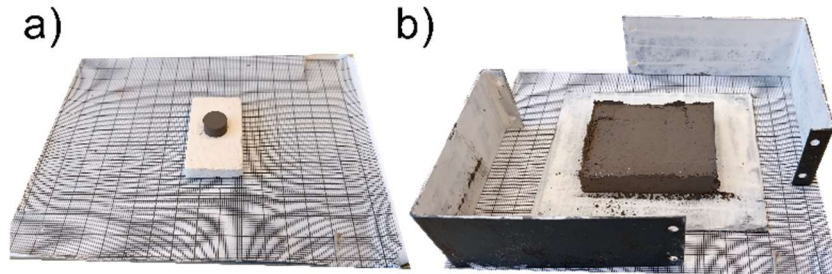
Appearance of the small, cylindrical (a) and large, square compact with the stainless steel mould (b).
